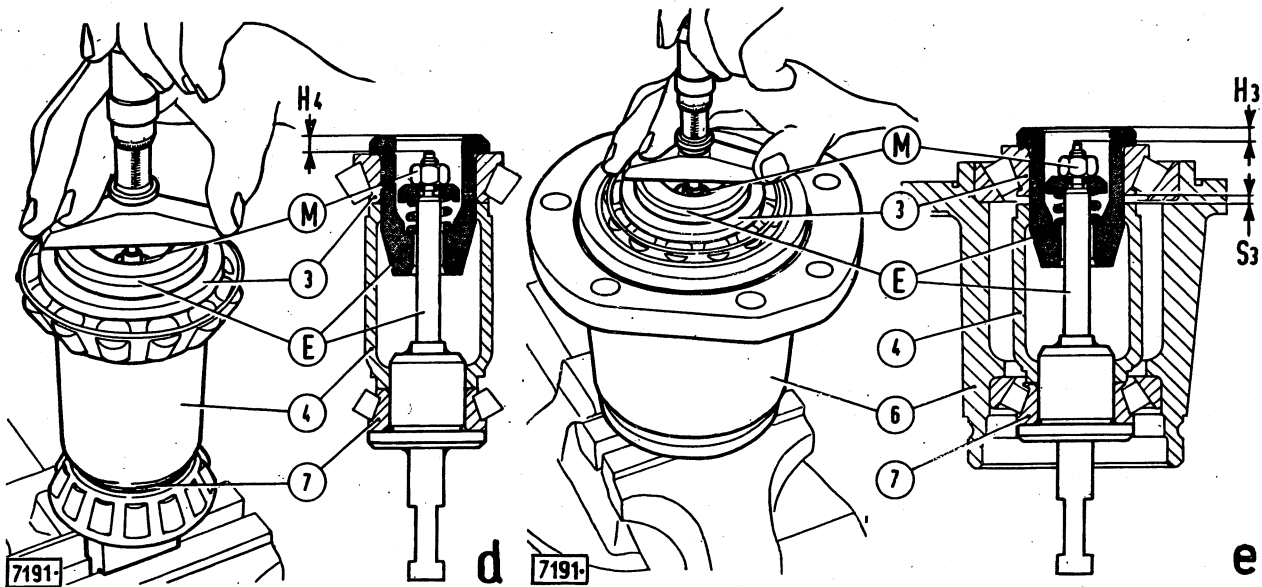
Finding the correct shimminh value (S_3 , Fig.5) for pinion shaft bearing adjustment using the special adaptor E 292501 (292503).
